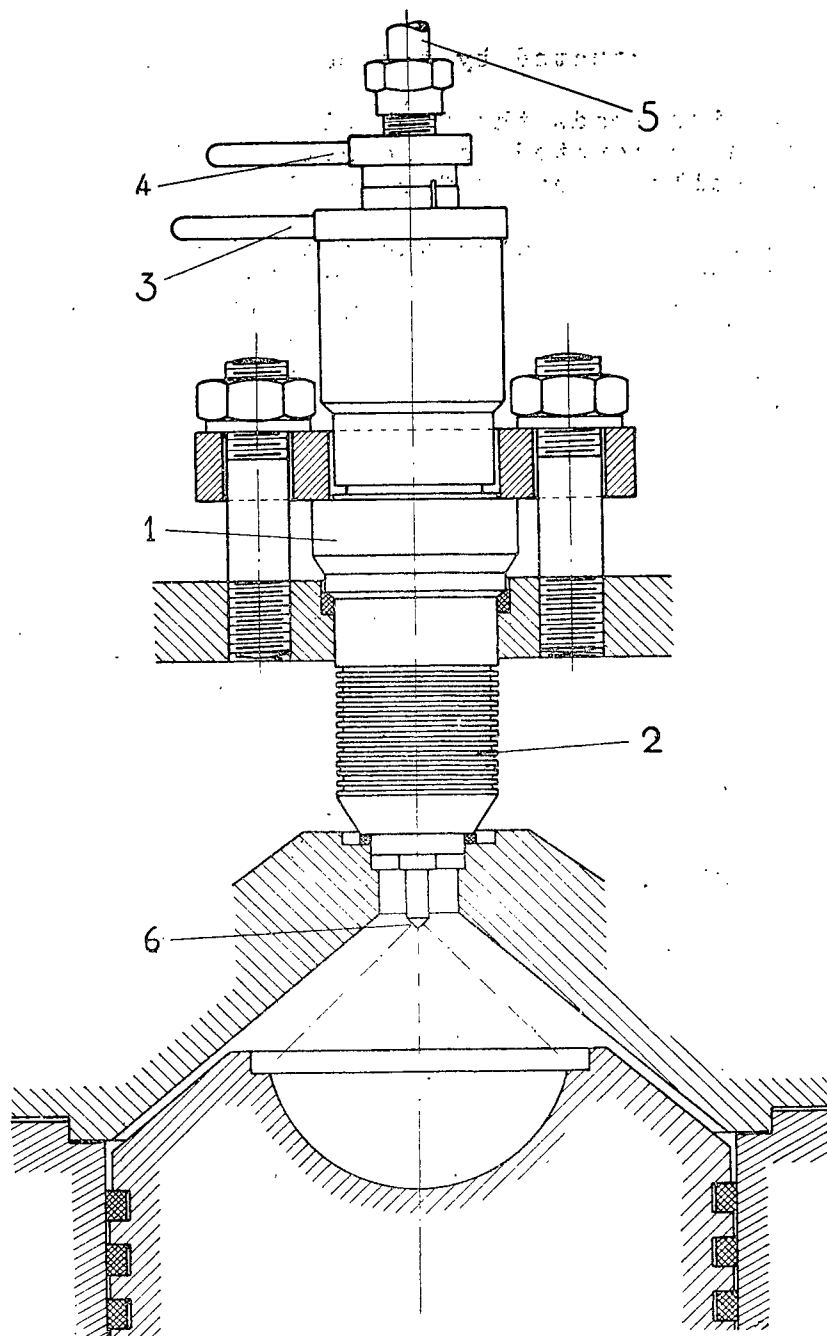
Tuscher pump mounted on cylinder head of Winterthur engine.
